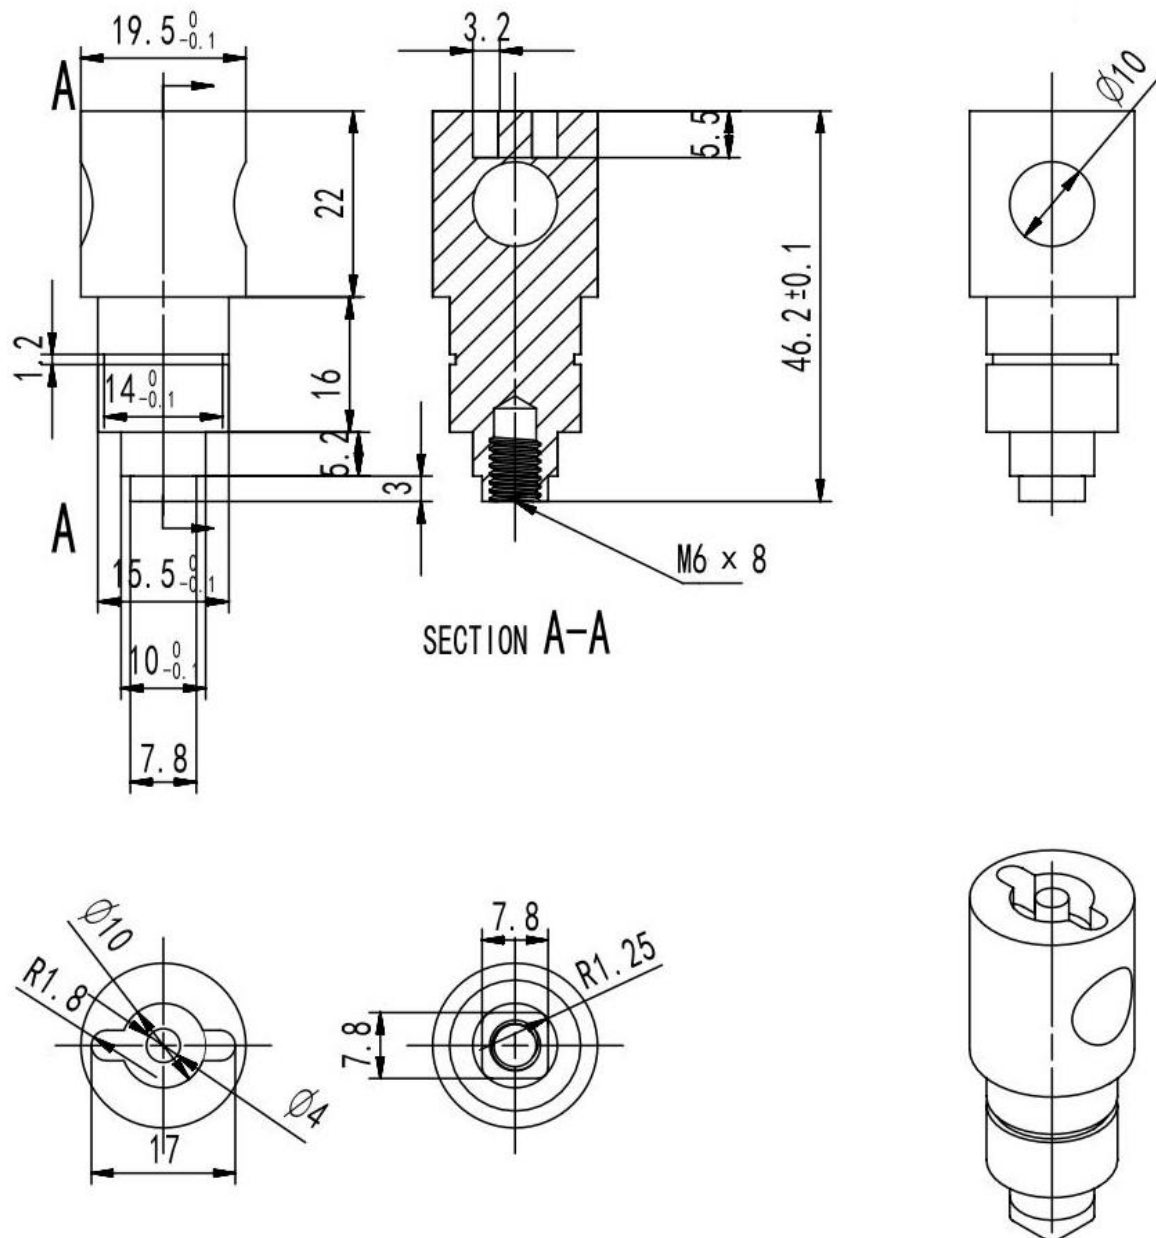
Details of Top Inner Door Camlock with Padlocking Provision
